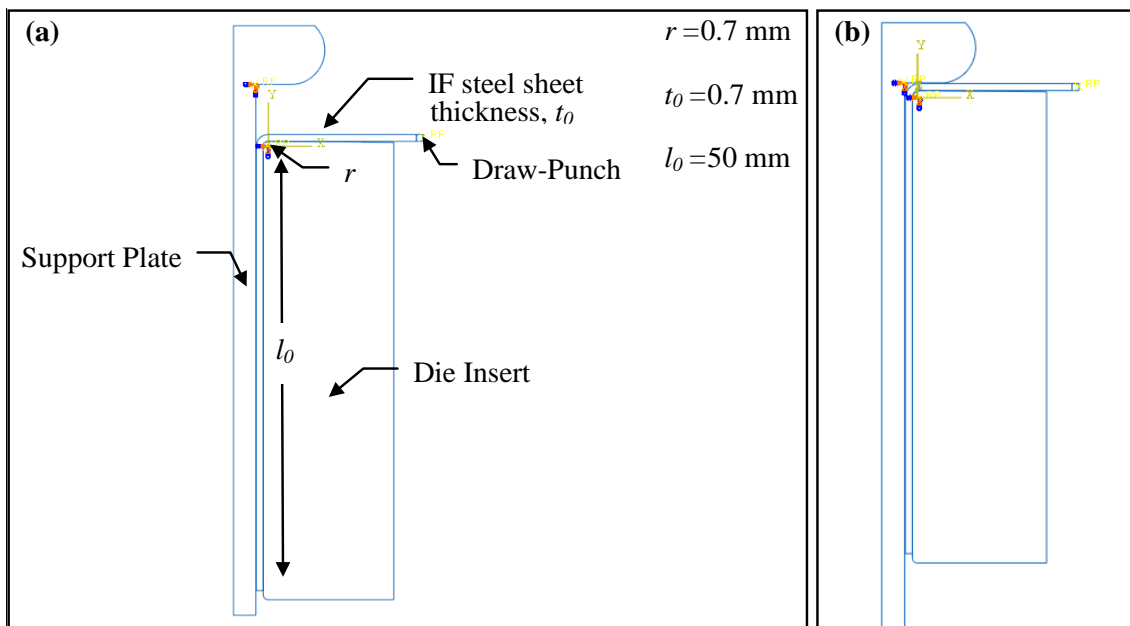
Schematic of the initial configuration: (a) open channel drawing, (b) closed channel drawing (ECAD).
